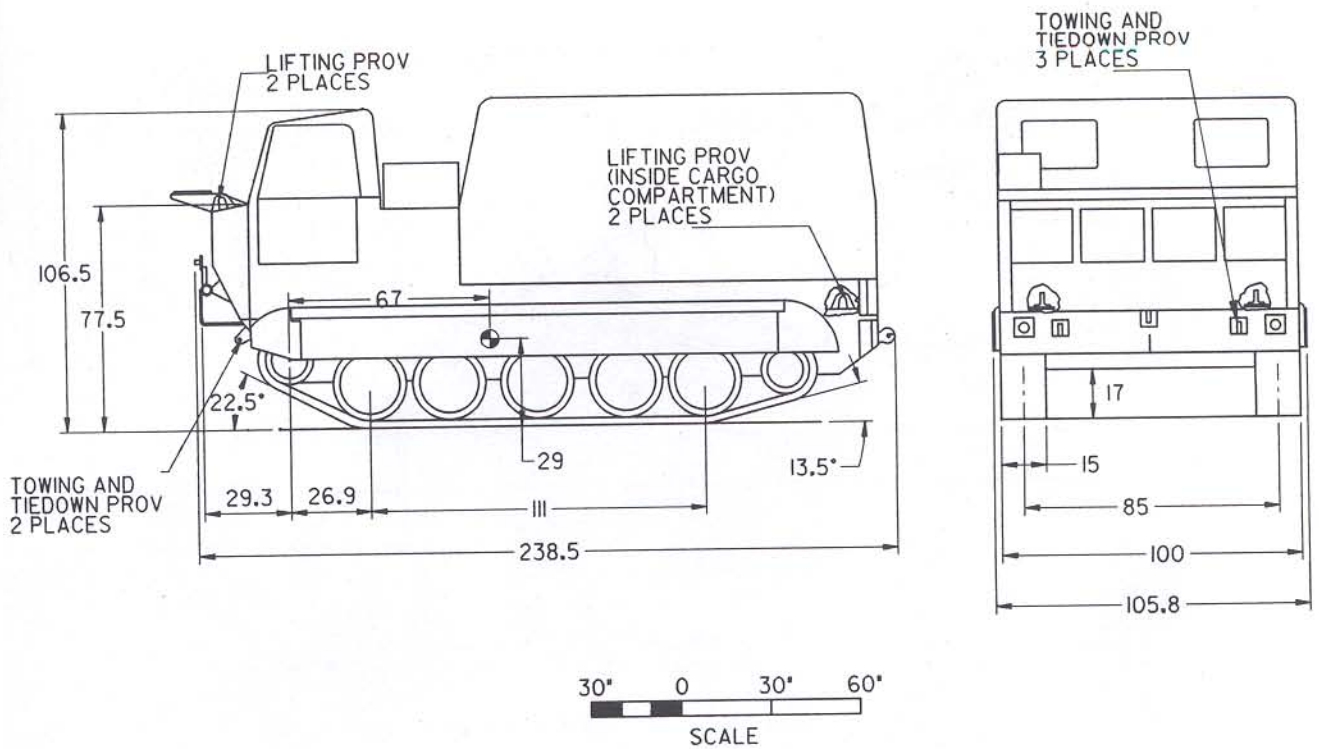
M730A2 Guided Missile Equipment Carrier. All dimensions are in inches.
